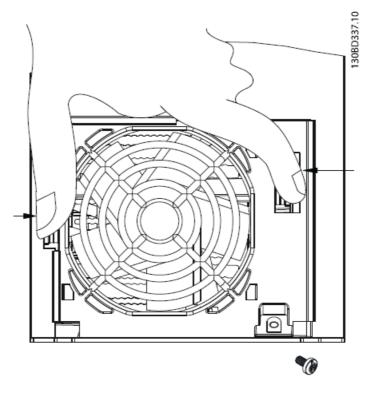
Pulling out Fan on Enclosure Size K3
